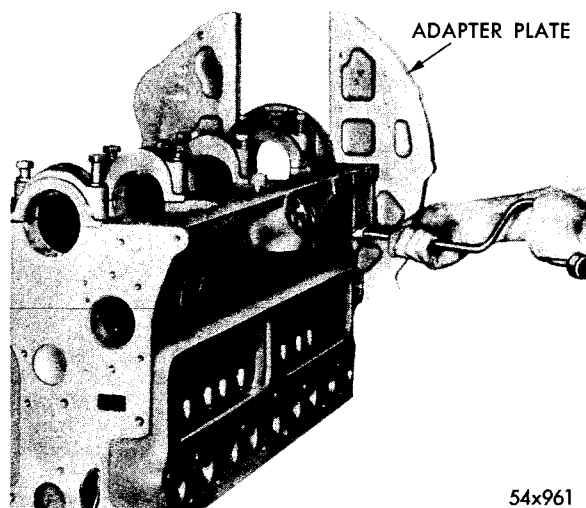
Installing the Adapter Plate on Engine Cylinder Block
